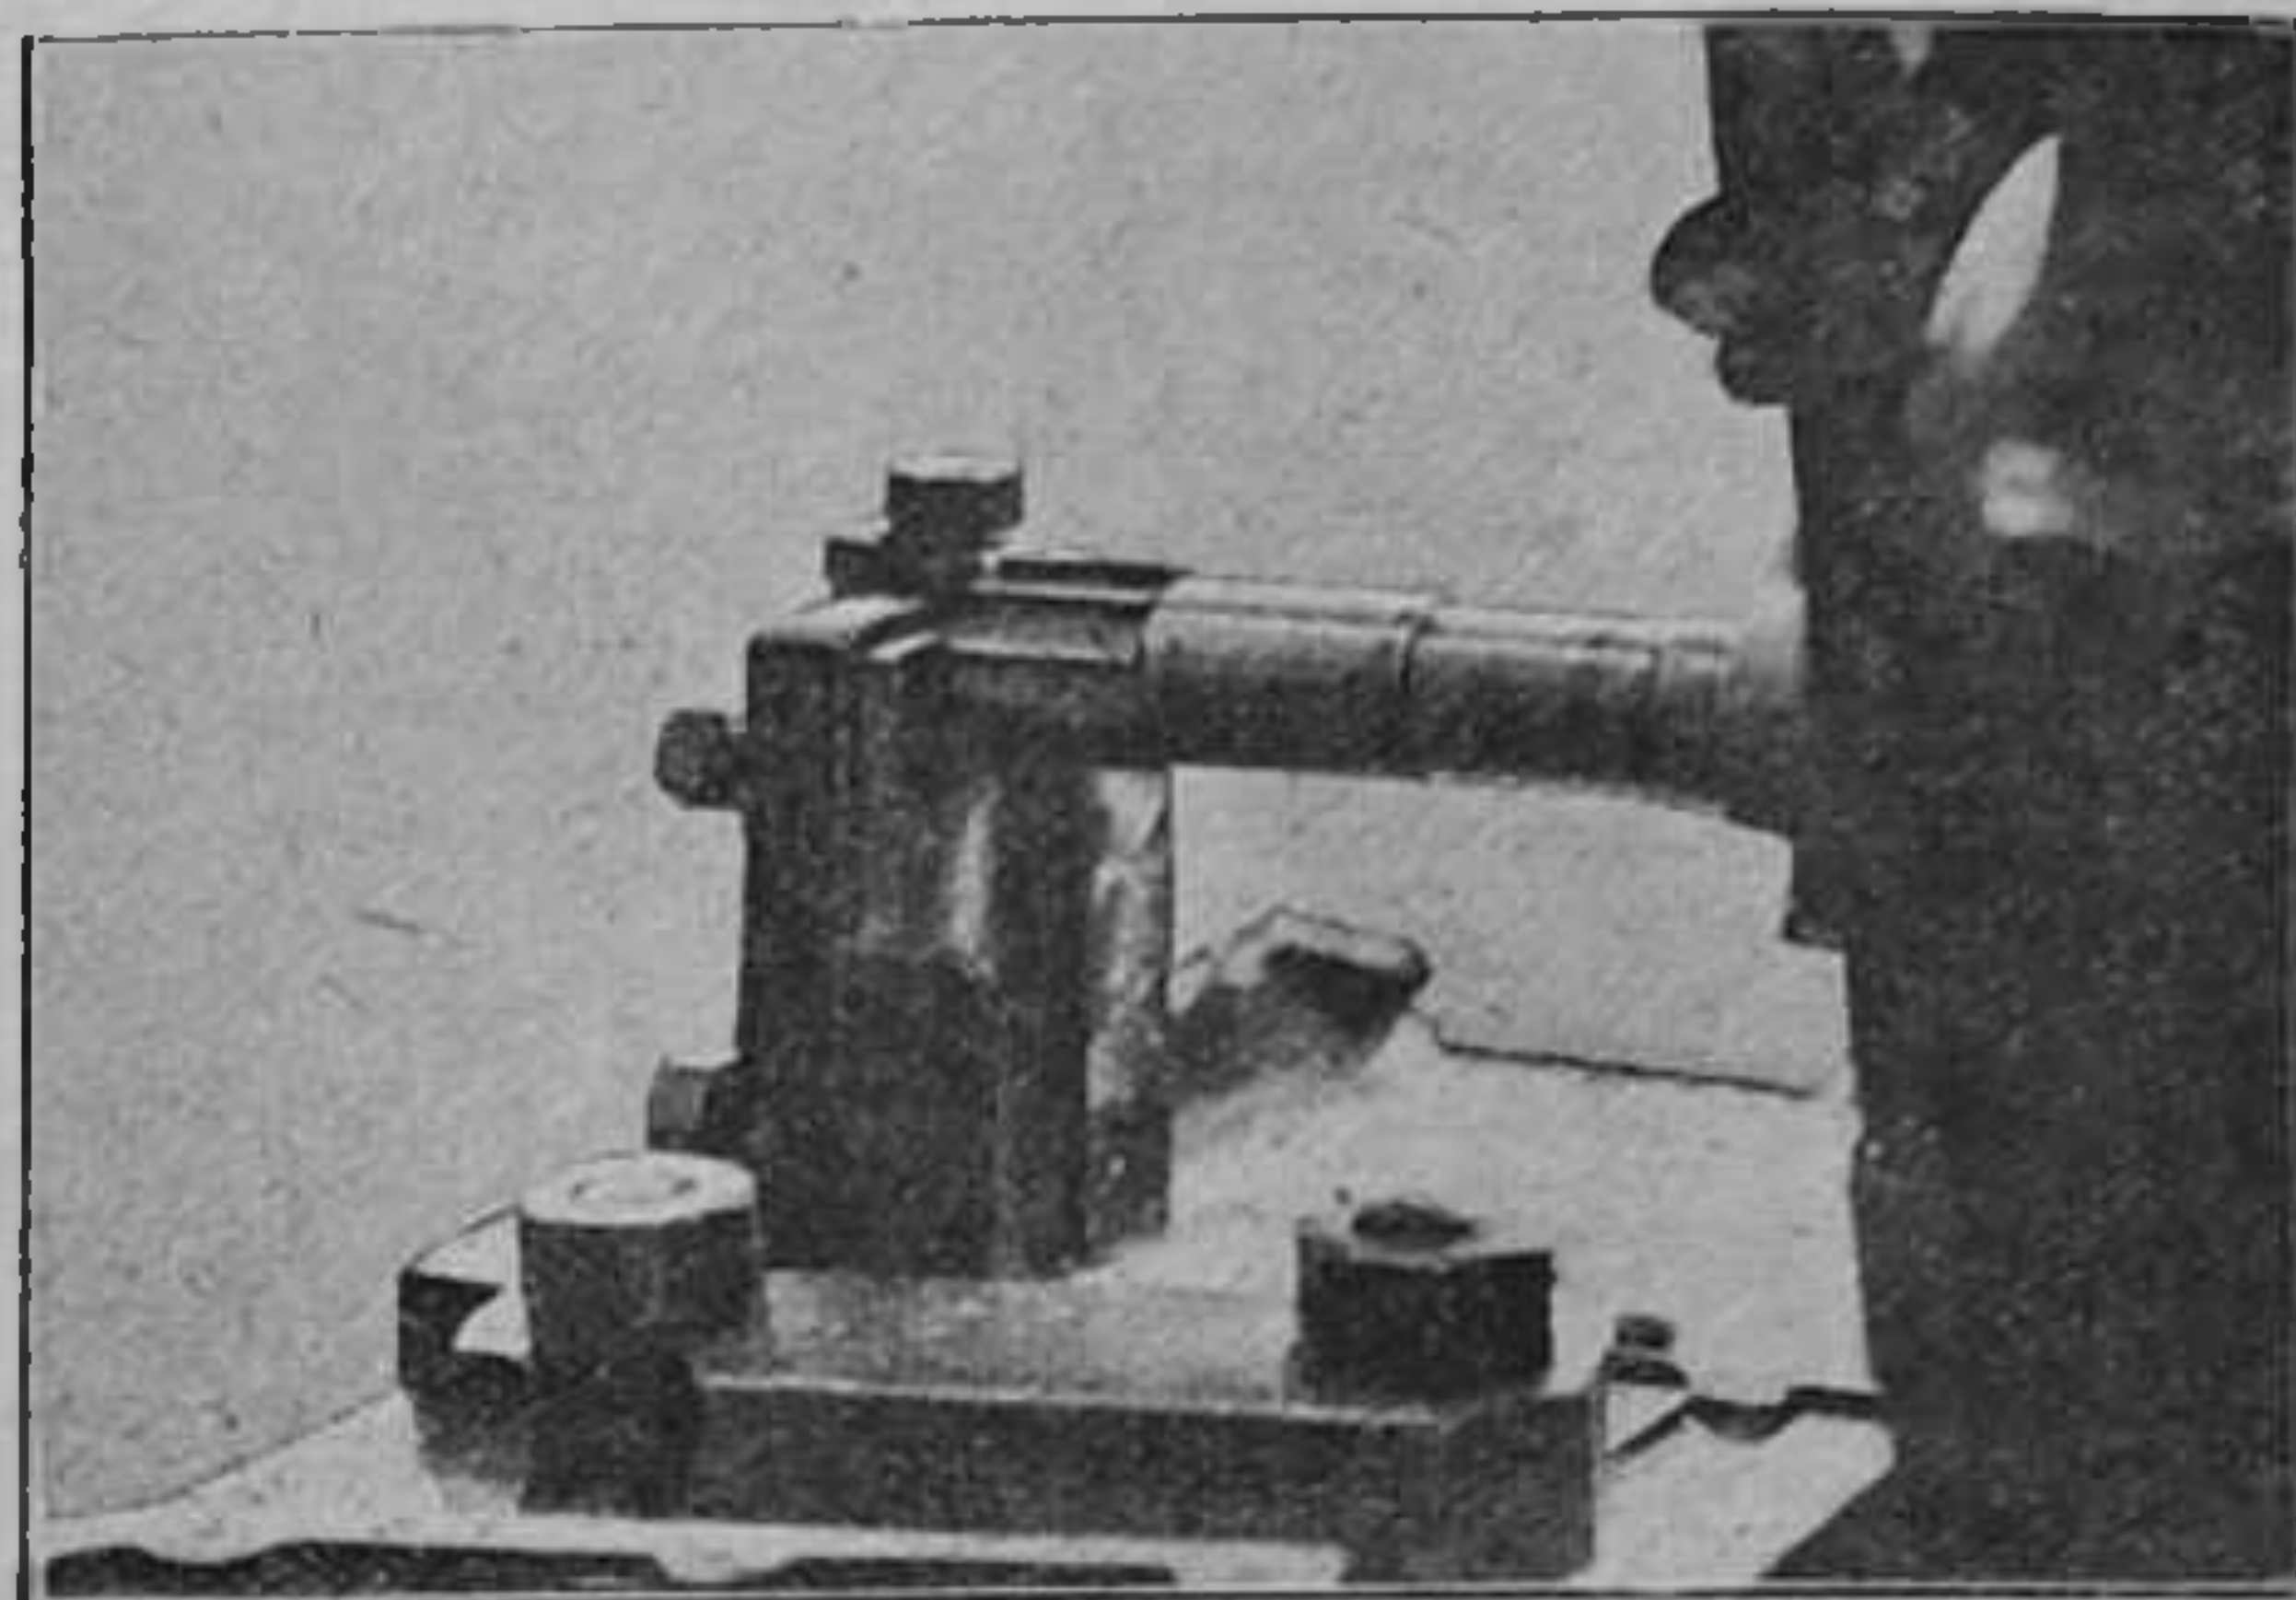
Milling the platform on which the magneto is carried. Reference should be made to Fig. 4 to appreciate which is actually the platform.
